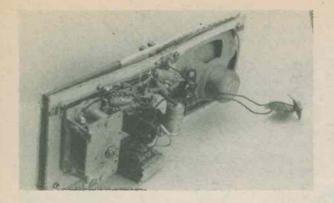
(a). Front view of a home-constructed slow-motion tuning drive. The control knob is removed
